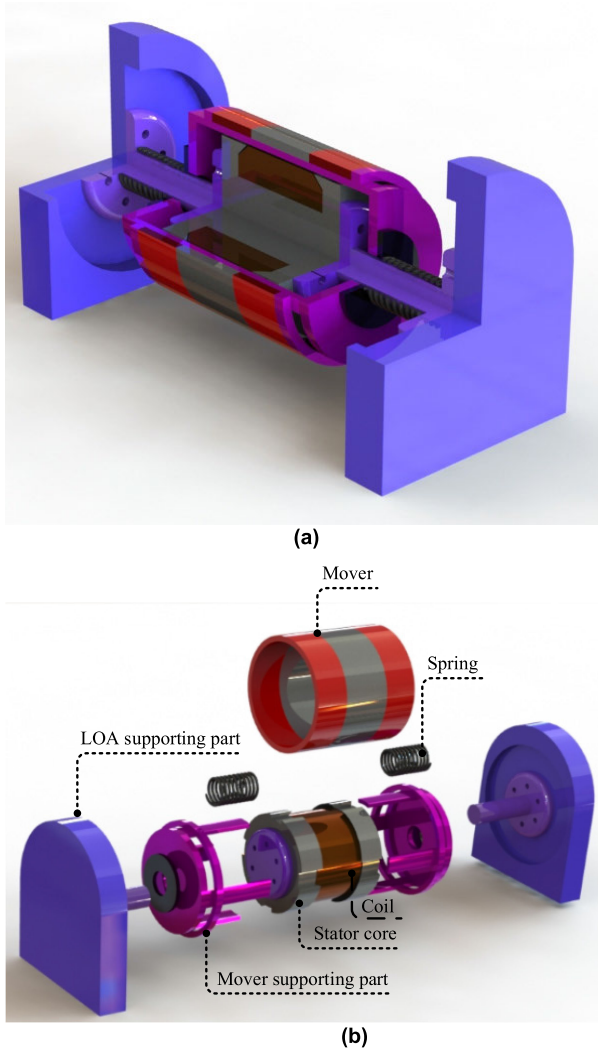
Complete assembly of proposed LOA (a) Section view (b) Exploded view.
